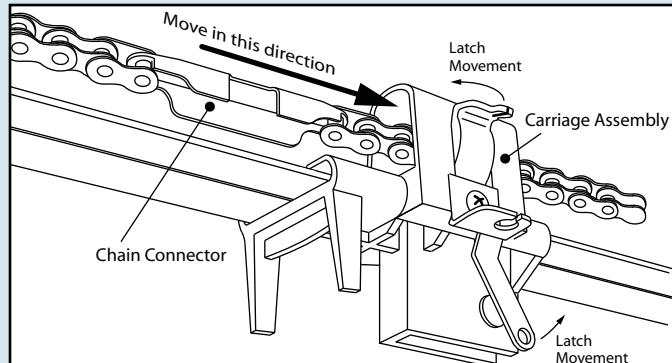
Engage Chain/Belt Connector to Carriage.
